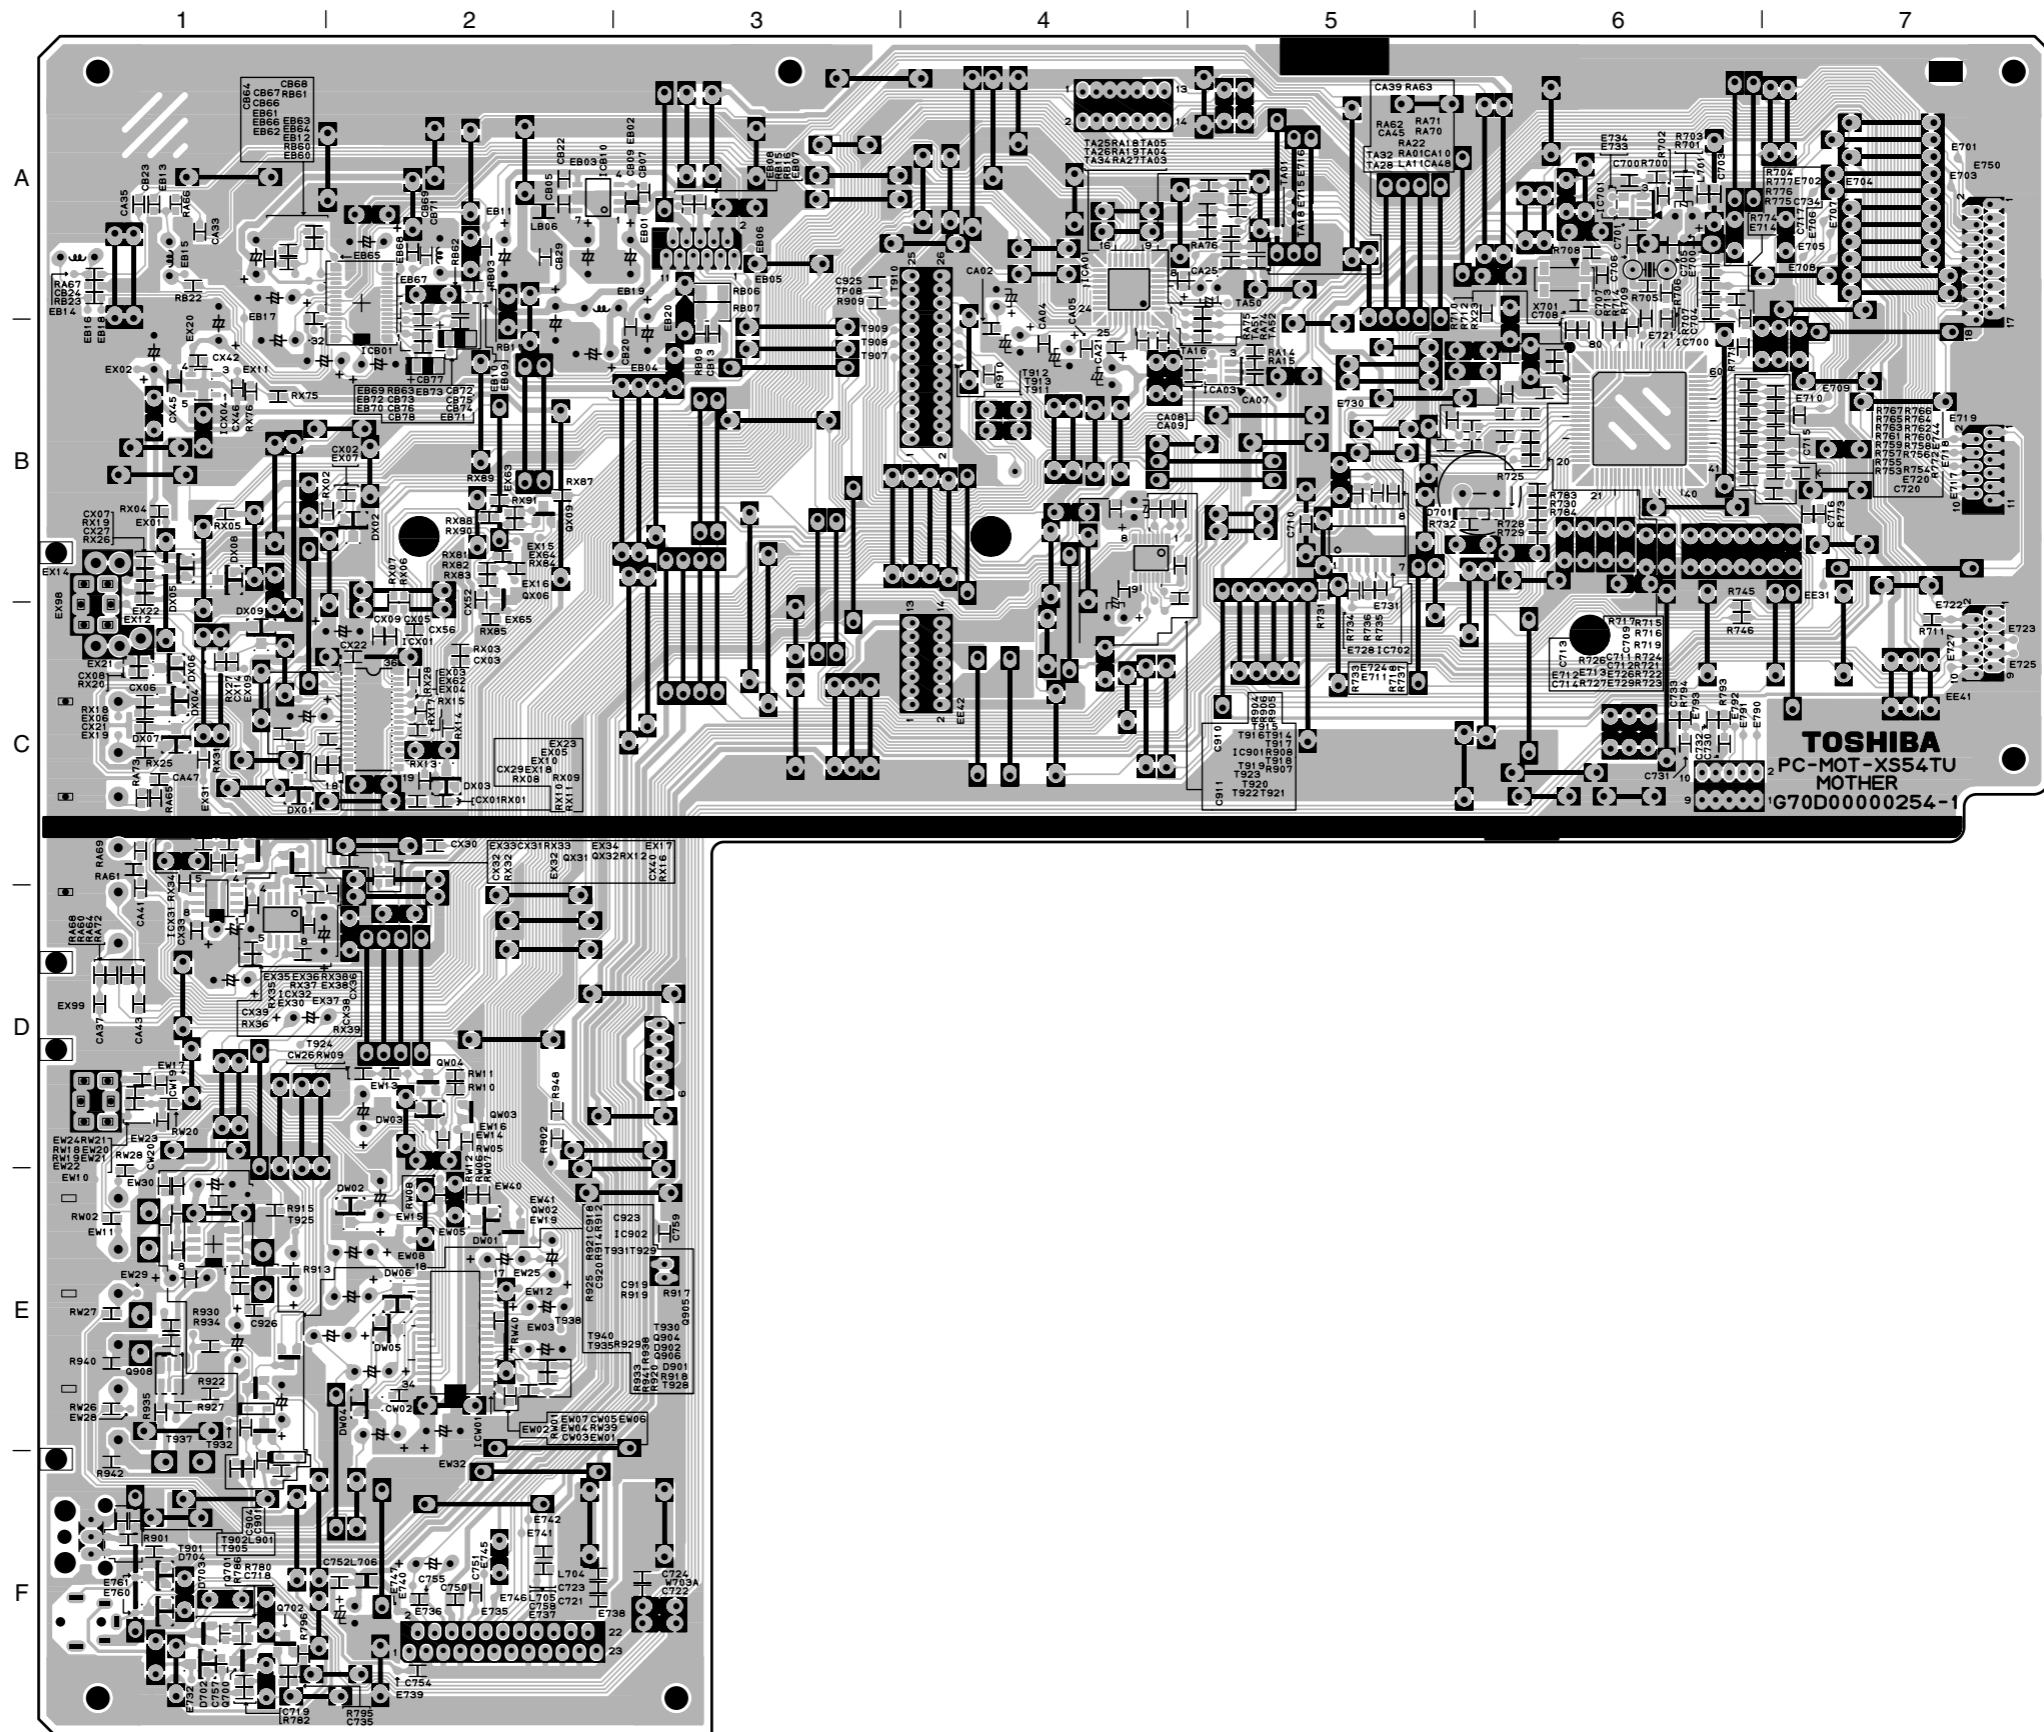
EU05 Mother PC Board (Bottom side)
